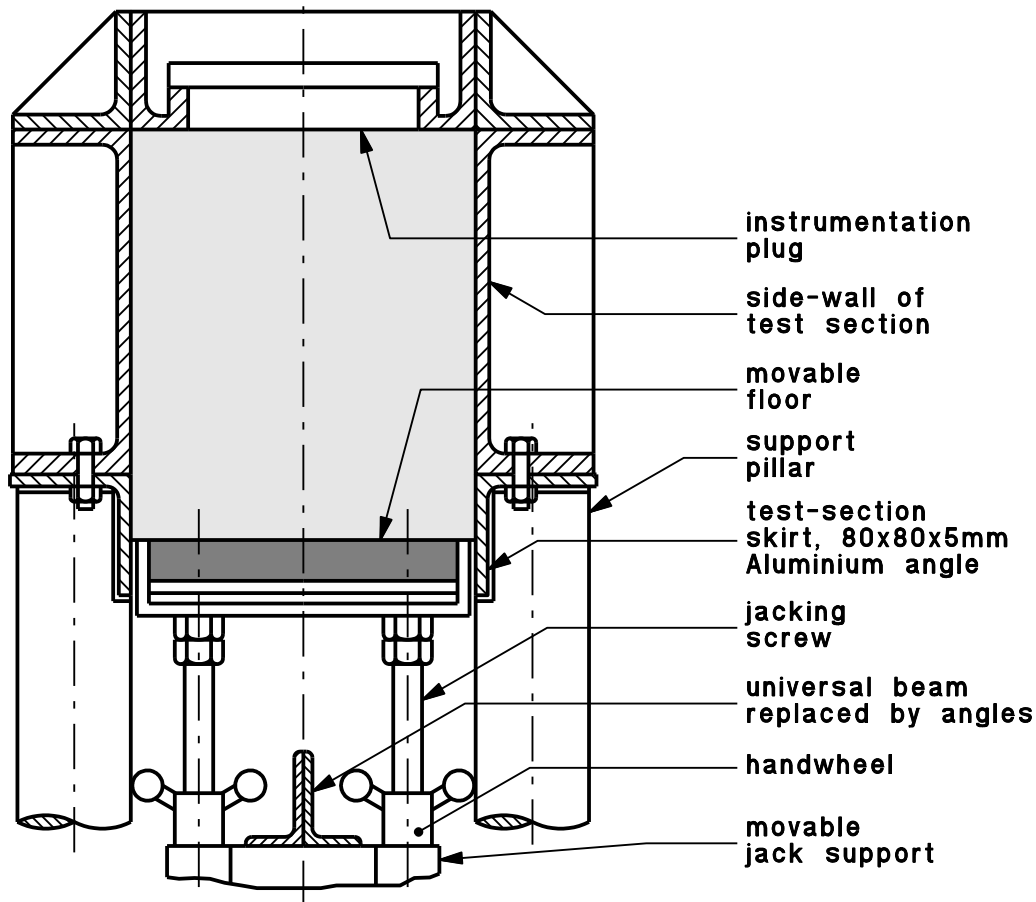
Addition of skirts to the wind-tunnel test section. The floor of the test section is below the original side walls. Scale 1:5.
